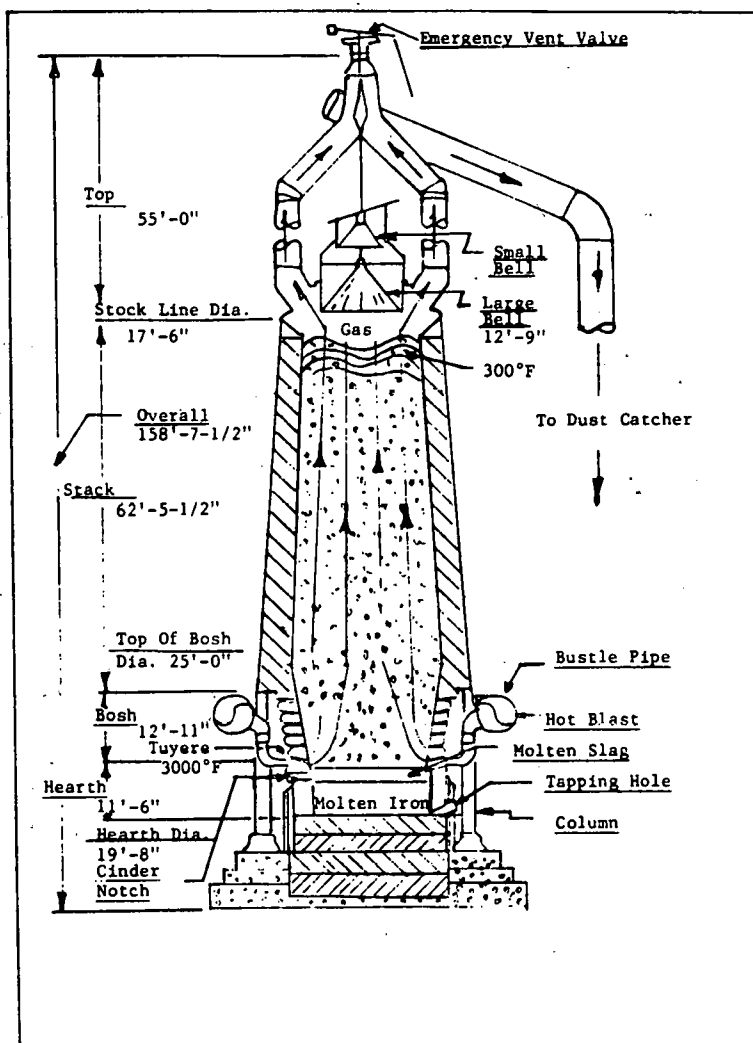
BLAST FURNACE 'B' WORKING DIMENSIONS
